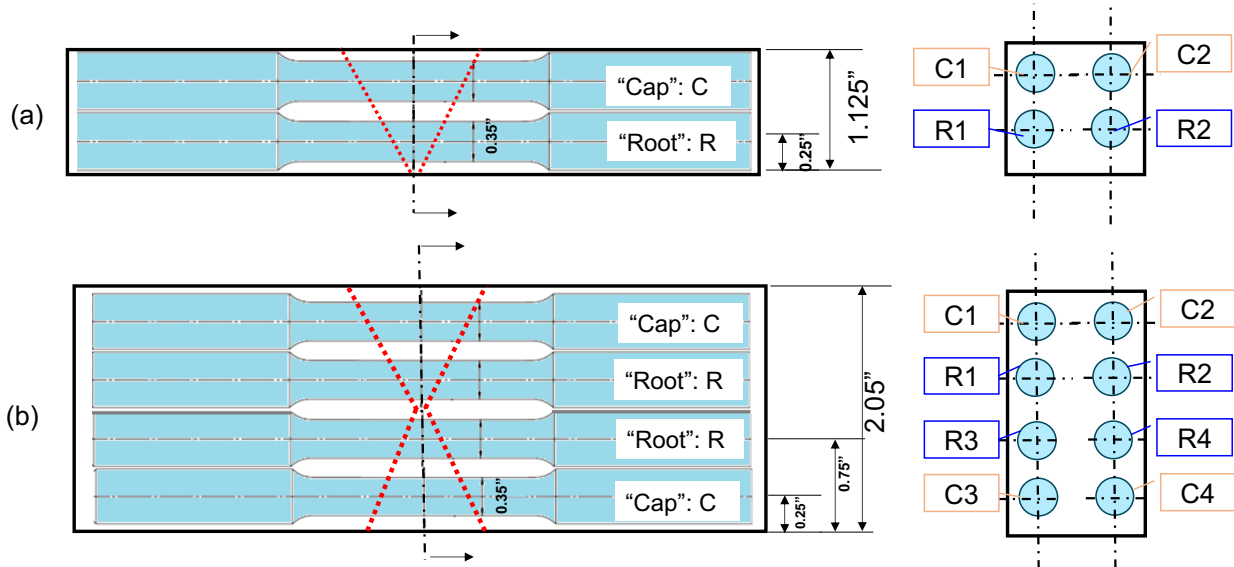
Schematics of the locations of the cross-weld weld tensile specimens
